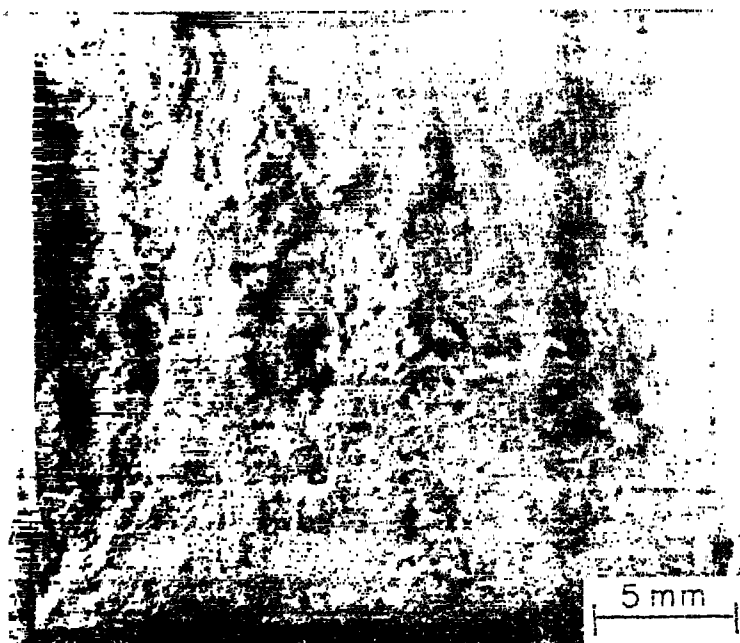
Fracture surface of specimen K, an HY-130 heat-treated weldment
